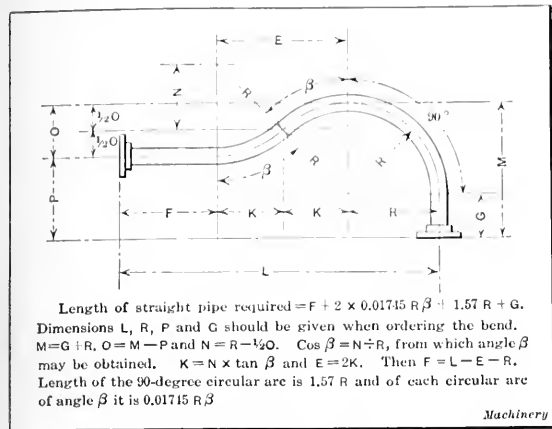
Single Offset Quarter Bend without a Straight Section between the Arcs
